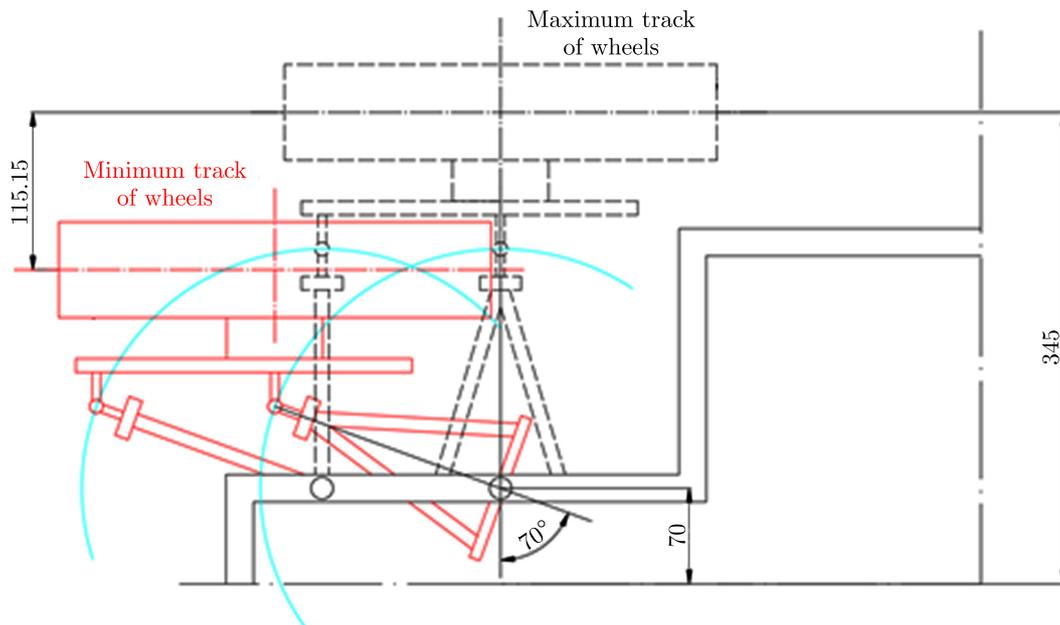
Scheme presenting the working principle of the mechanism changing the track of wheels
